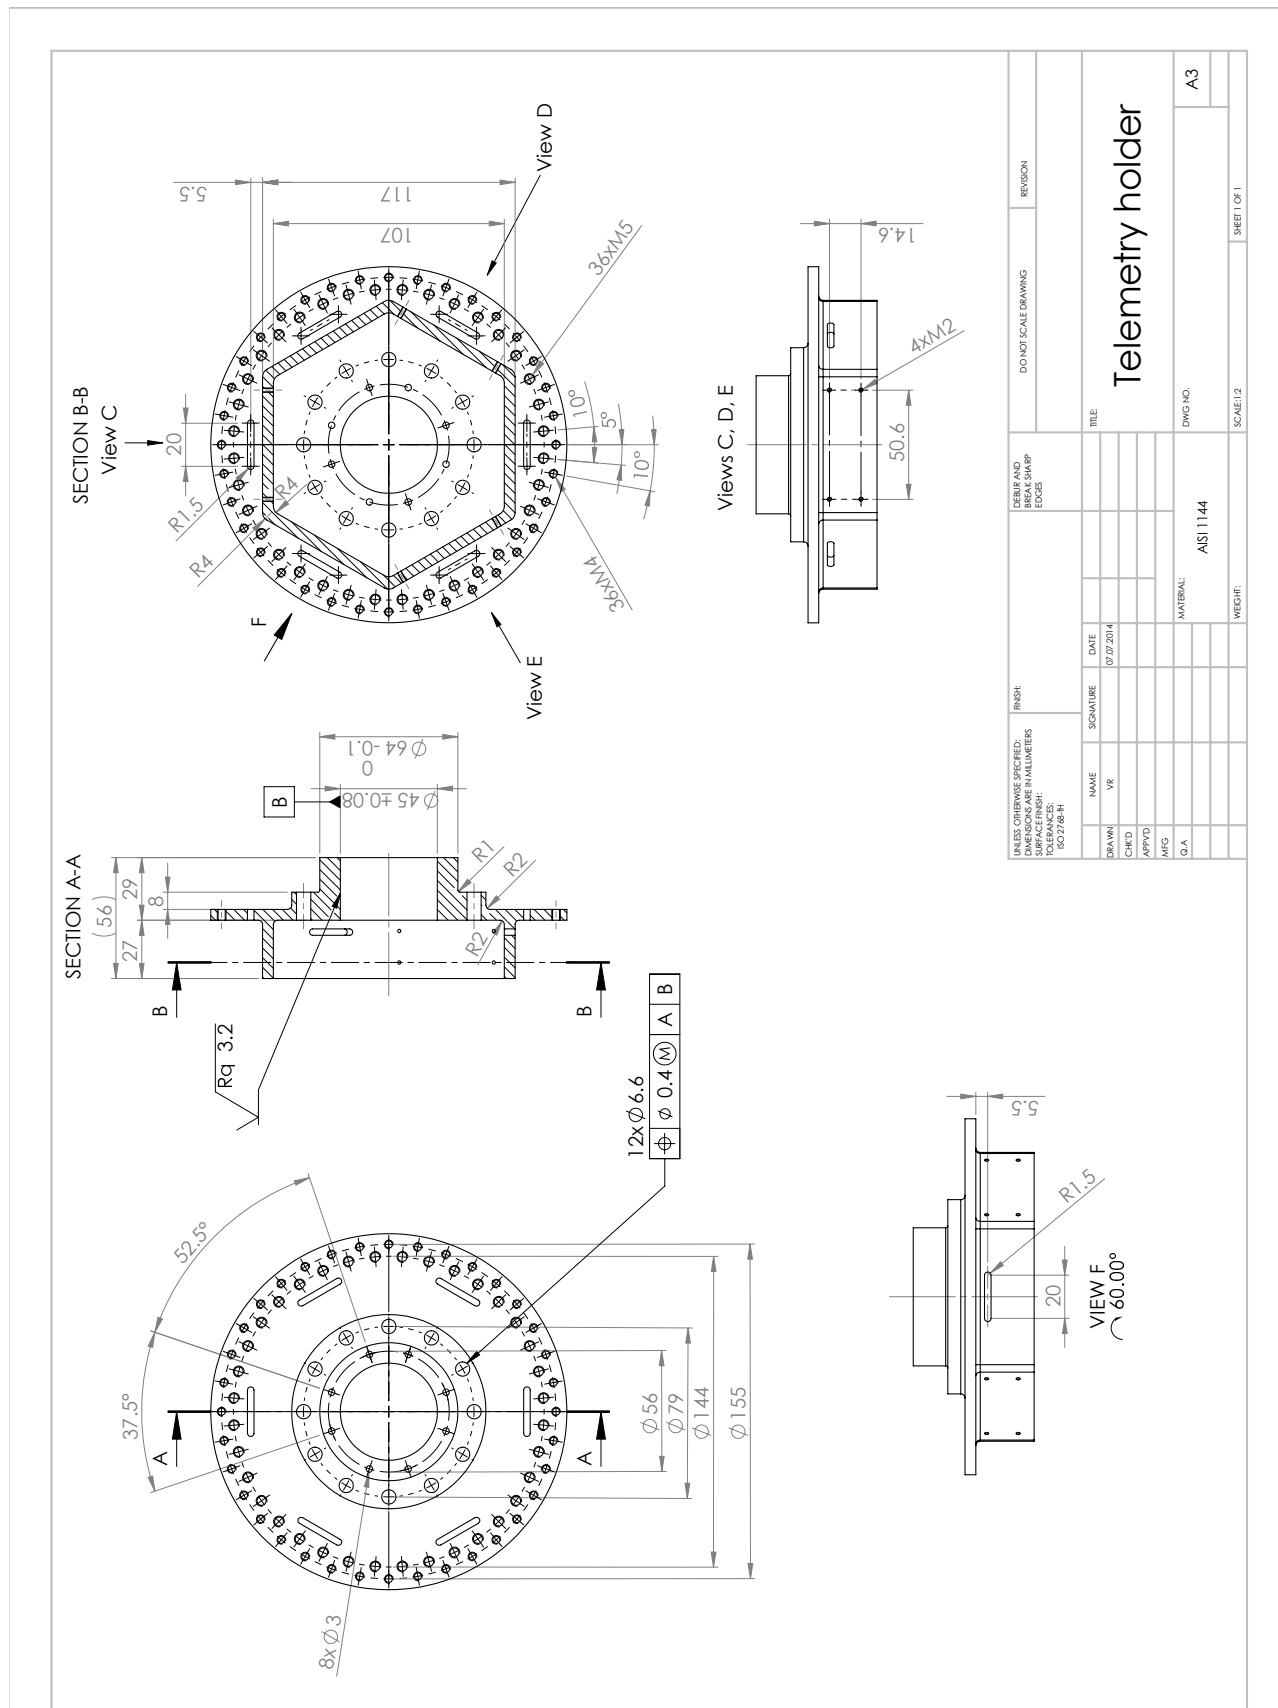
Multi-function disc: telemetry holder, balancing disc, mounting for test piece.
